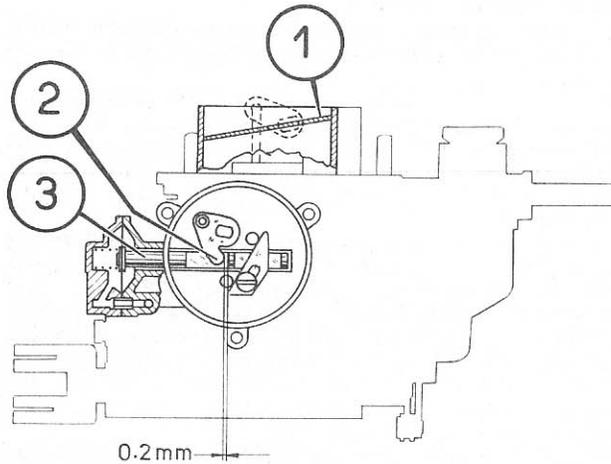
Automatic choke minimum clearance check location (40 DFA and 40DFAV types) (Sec 8)
